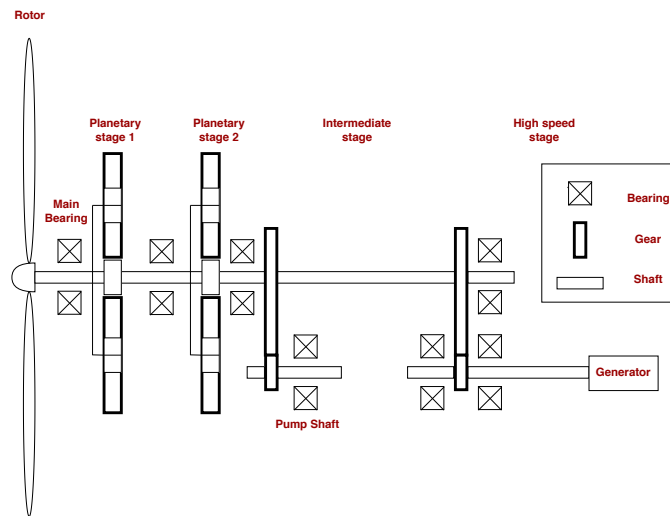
Double Planetary Stage Wind Turbine Gearbox Configuration
